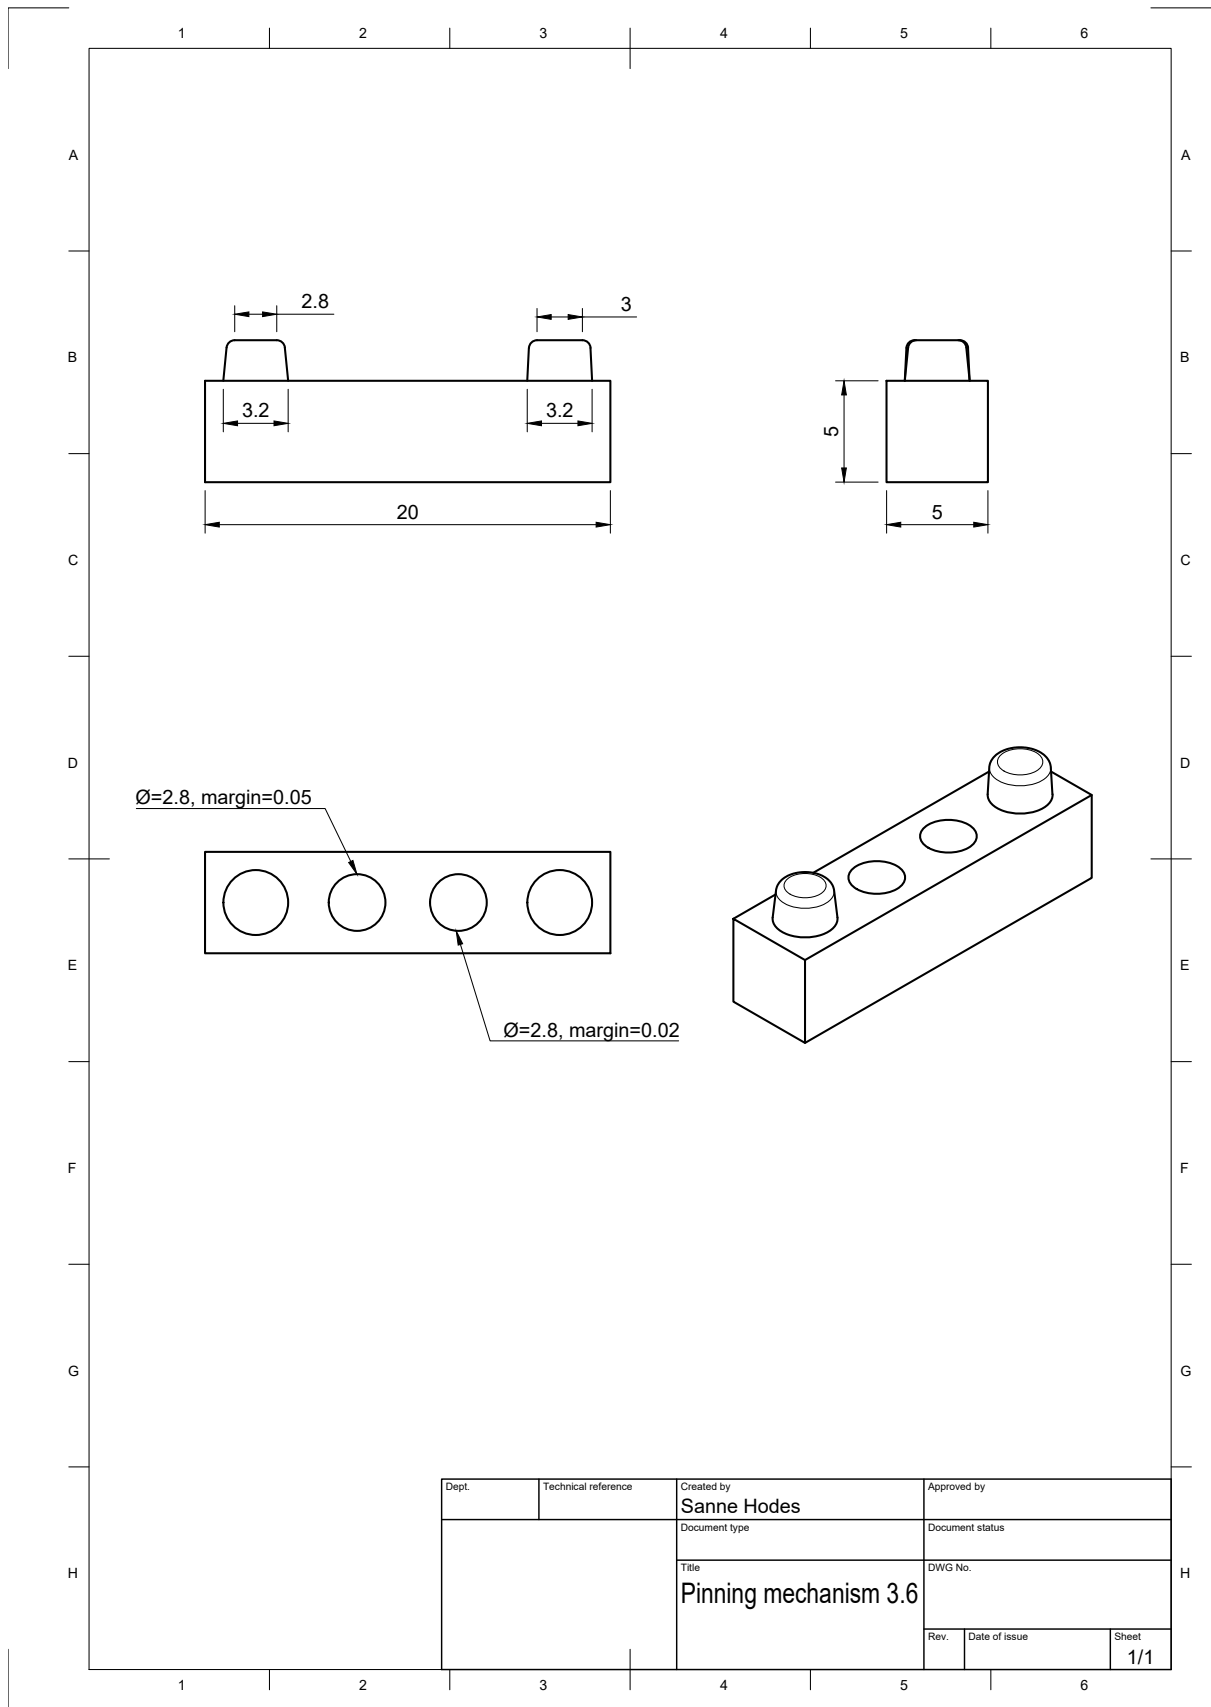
Technical drawing of the test cube for the pinning mechanism with the larger pins
